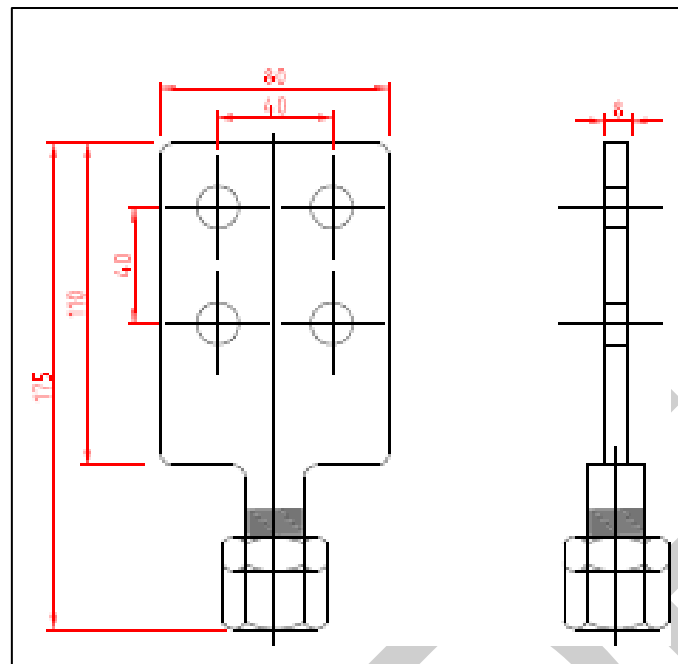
Aluminium Bronze Four bolt Terminal Connector for 18mm Cu solid Bus Bar
